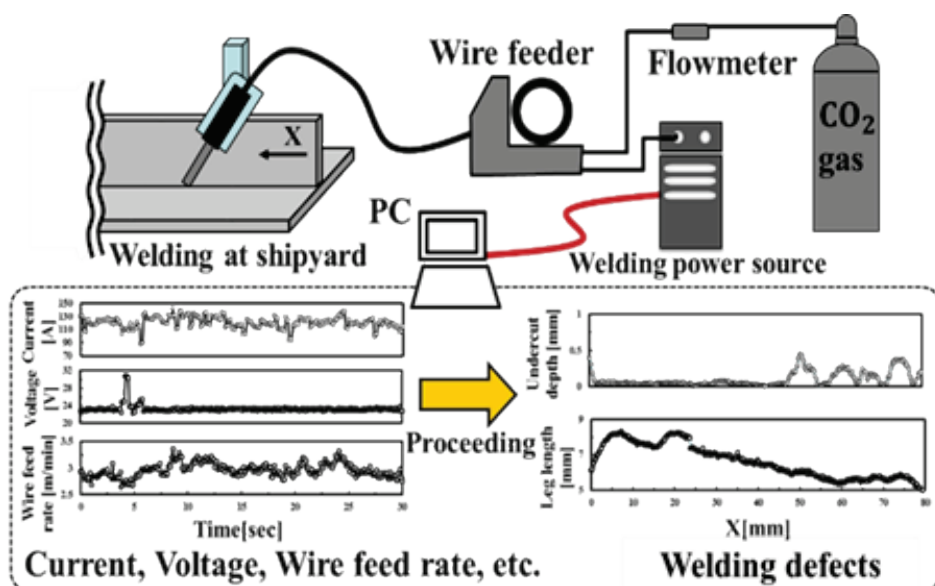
Conceptual diagram of in-line welding inspection system.
